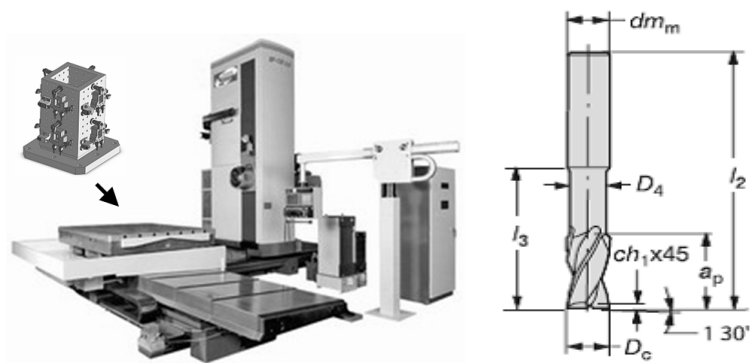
Horizontal Boring/Milling Machine [10], and selected Coromill tool [6]
